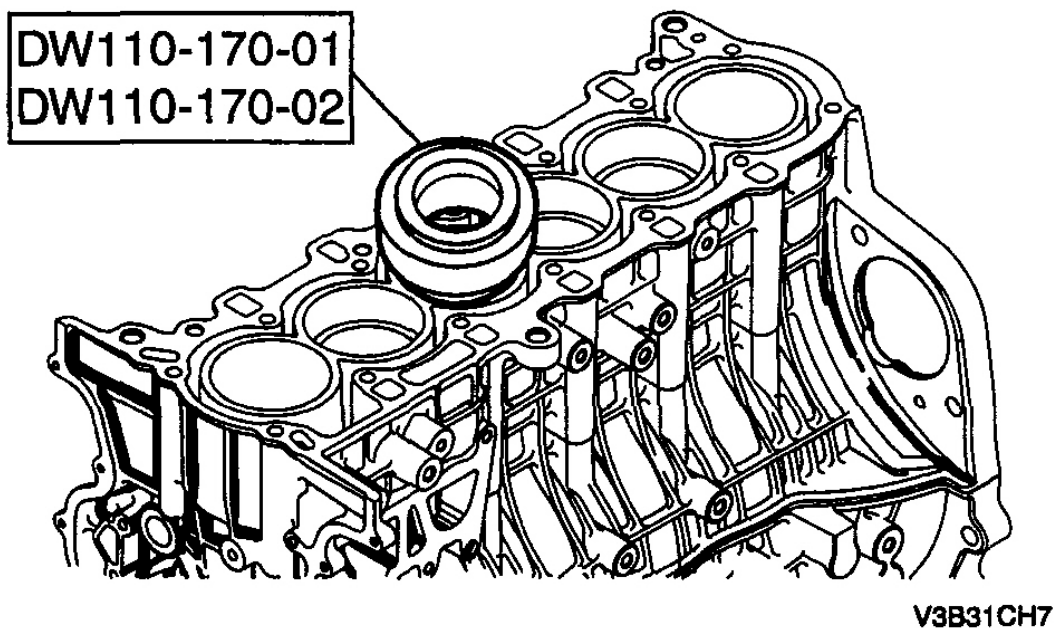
Installing Piston Using Piston Ring Compressor DW110-170-01
